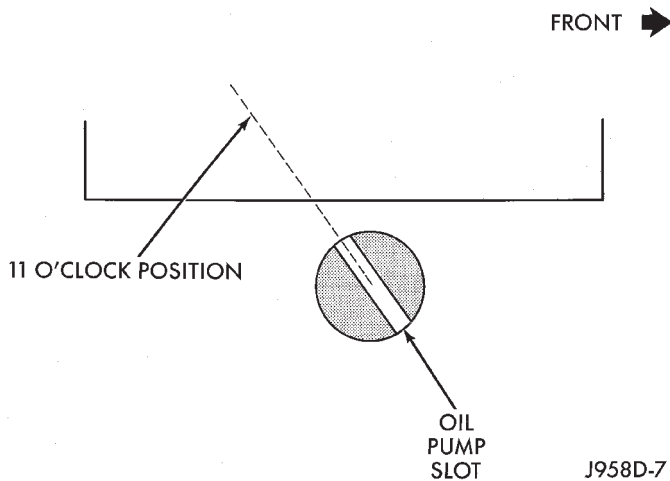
Slot At 11 O'clock Position—4.0L Engine
